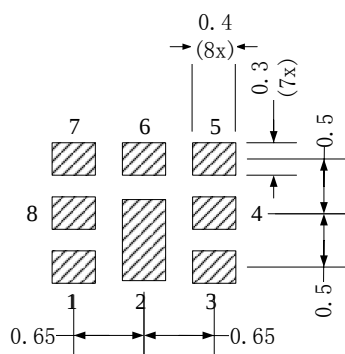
Drawing of package with package height A = 0.6 mm (max.)
